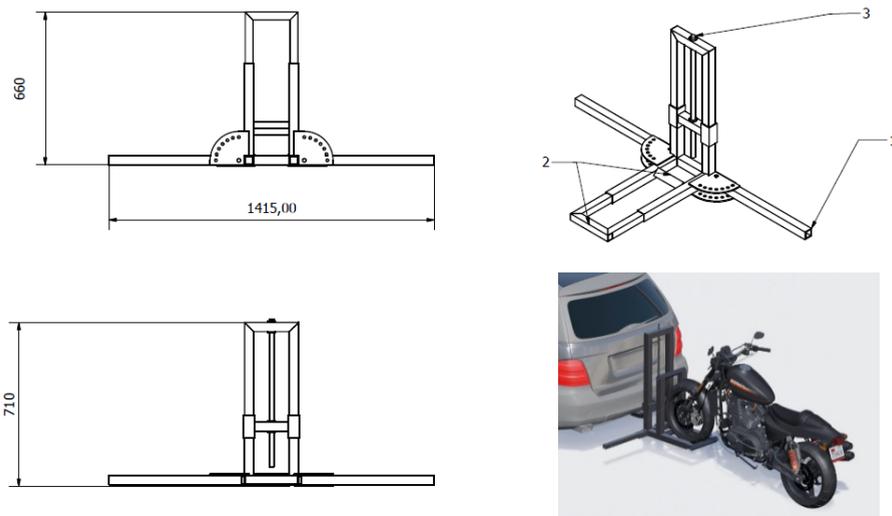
Transport device based on patent PL 224395 B1 consisting of: (1) mounting holes, (2) wheel mounting beams, (3) trapezoidal screw
